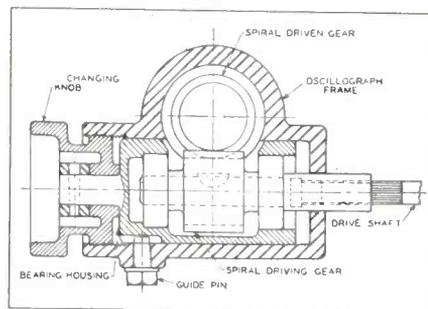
Phase shift control is effected by advancing minor shaft using spiral gears
